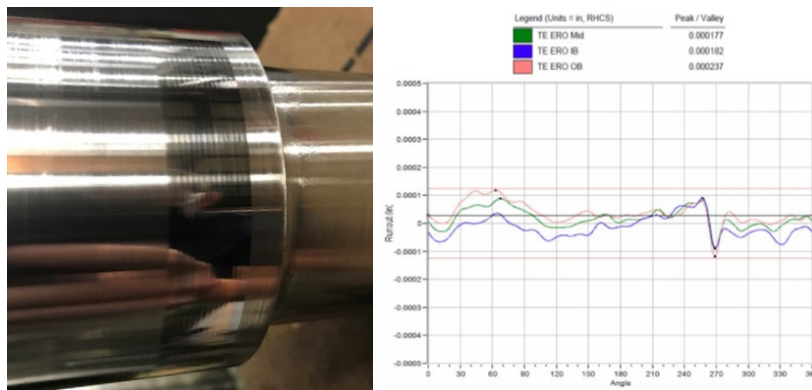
Example of a burnished probe area after repair (left). The repaired region appears dark because of a difference in hardness between the base and weld metal, however, the repair met the geometric tolerances, surface finish, and electrical runout (right) required for a probe area.
